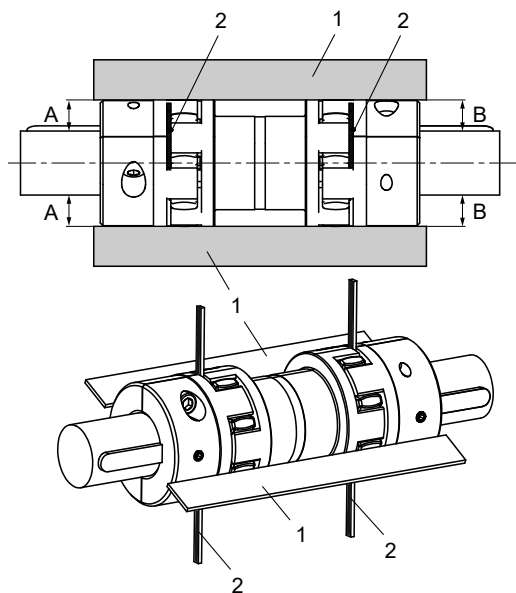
Double Cardan spacer-type coupling, checking the coupling alignment
